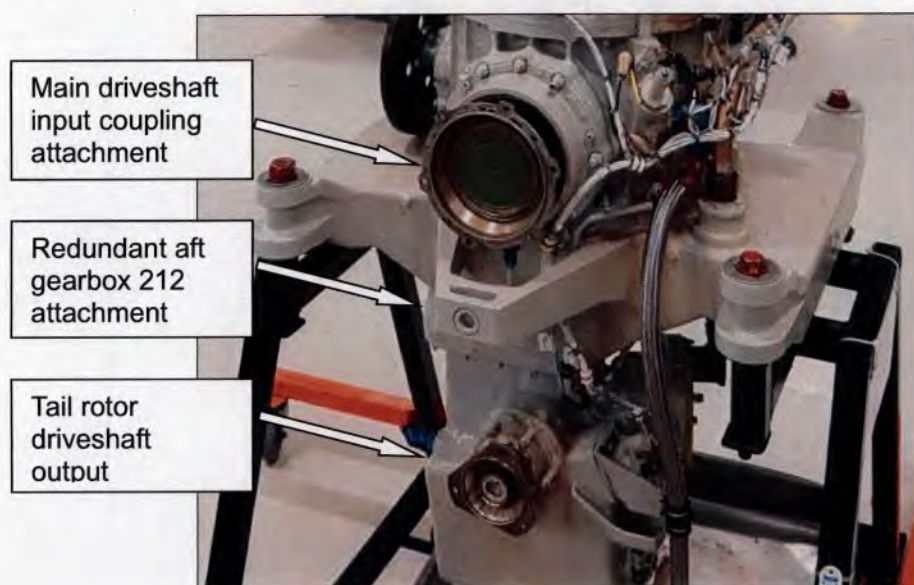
Rear view of main gearbox uninstalled from aircraft
